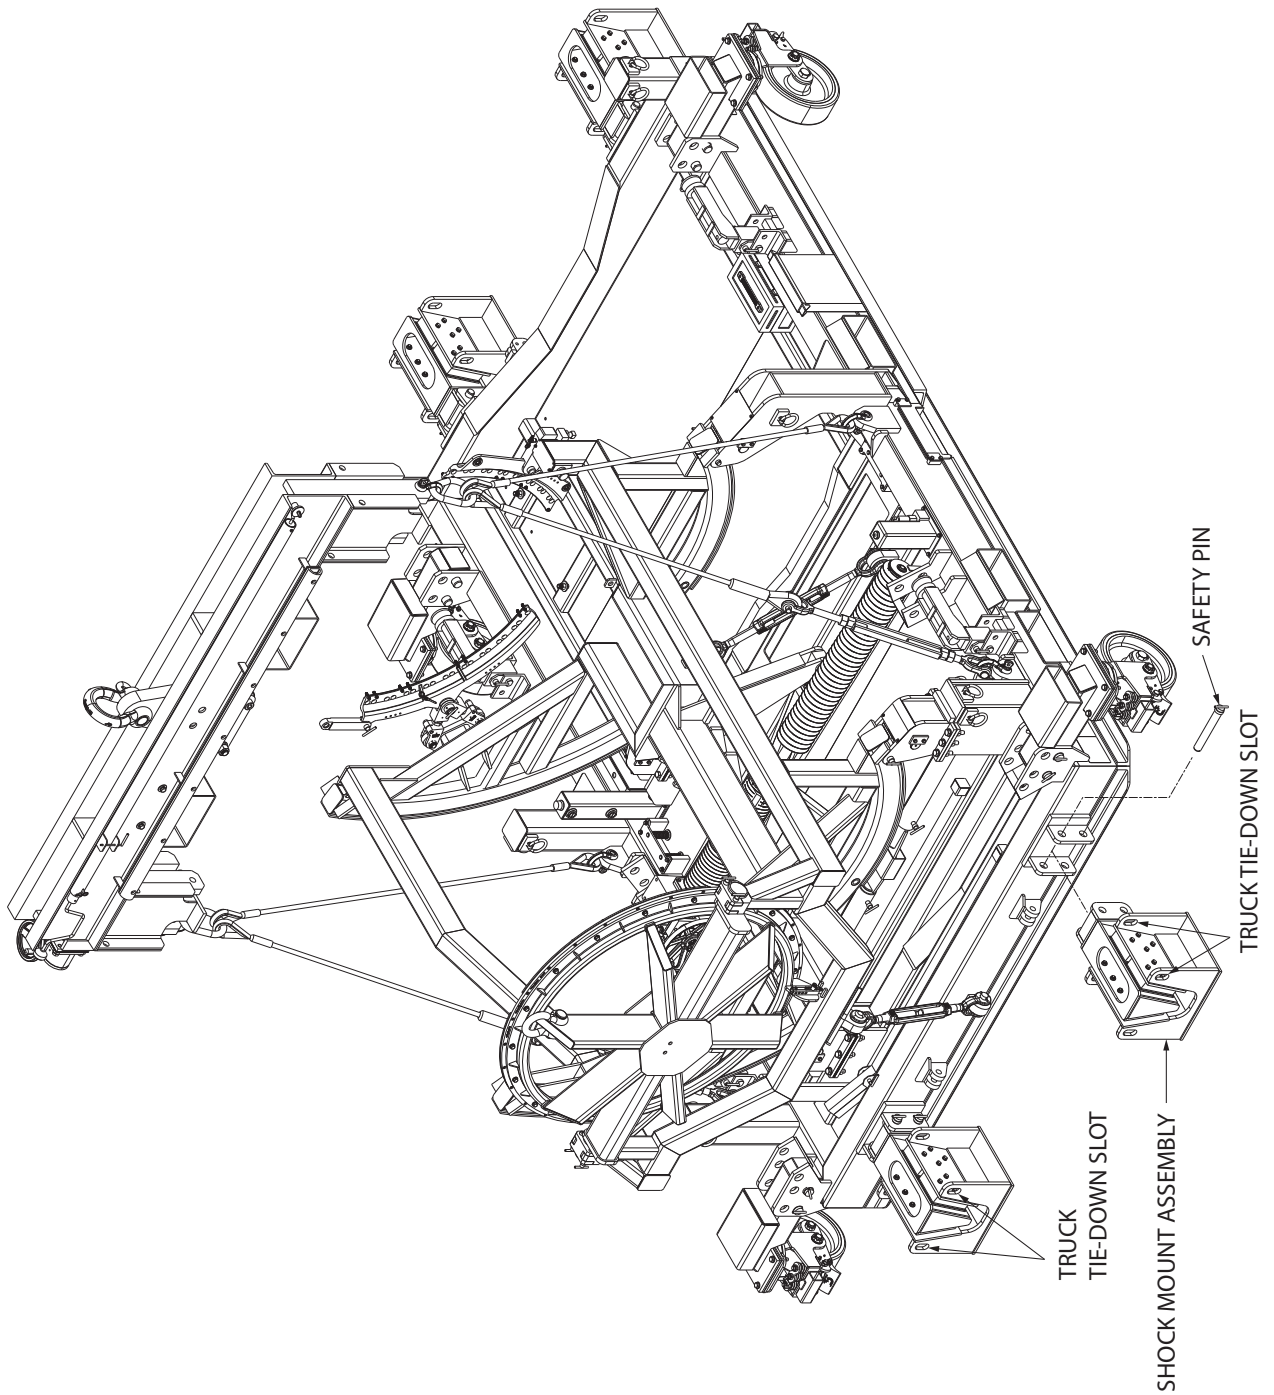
Shock Mount Installation Using a Sling
